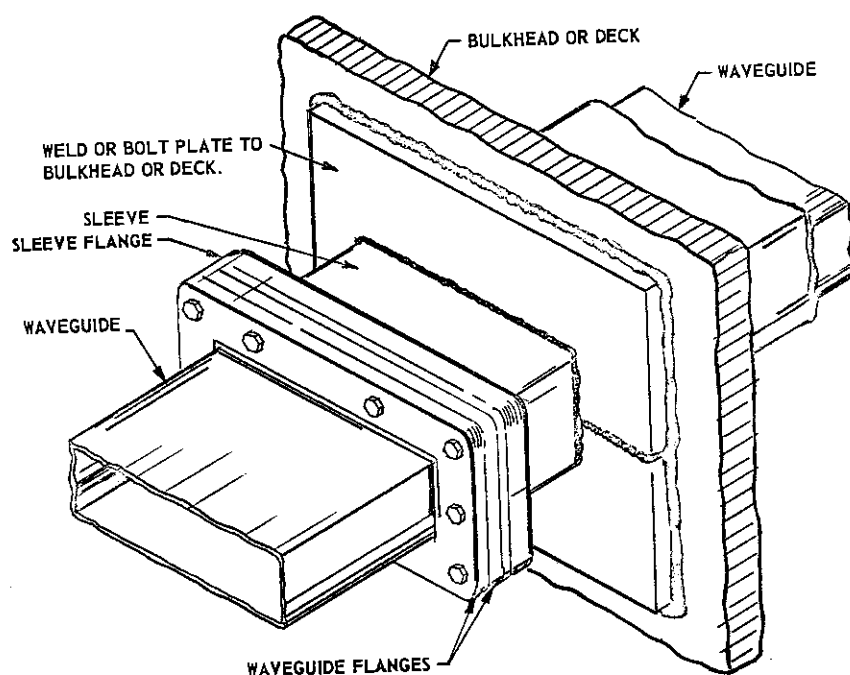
Waveguide Installed Thru Bulkhead or Deck
